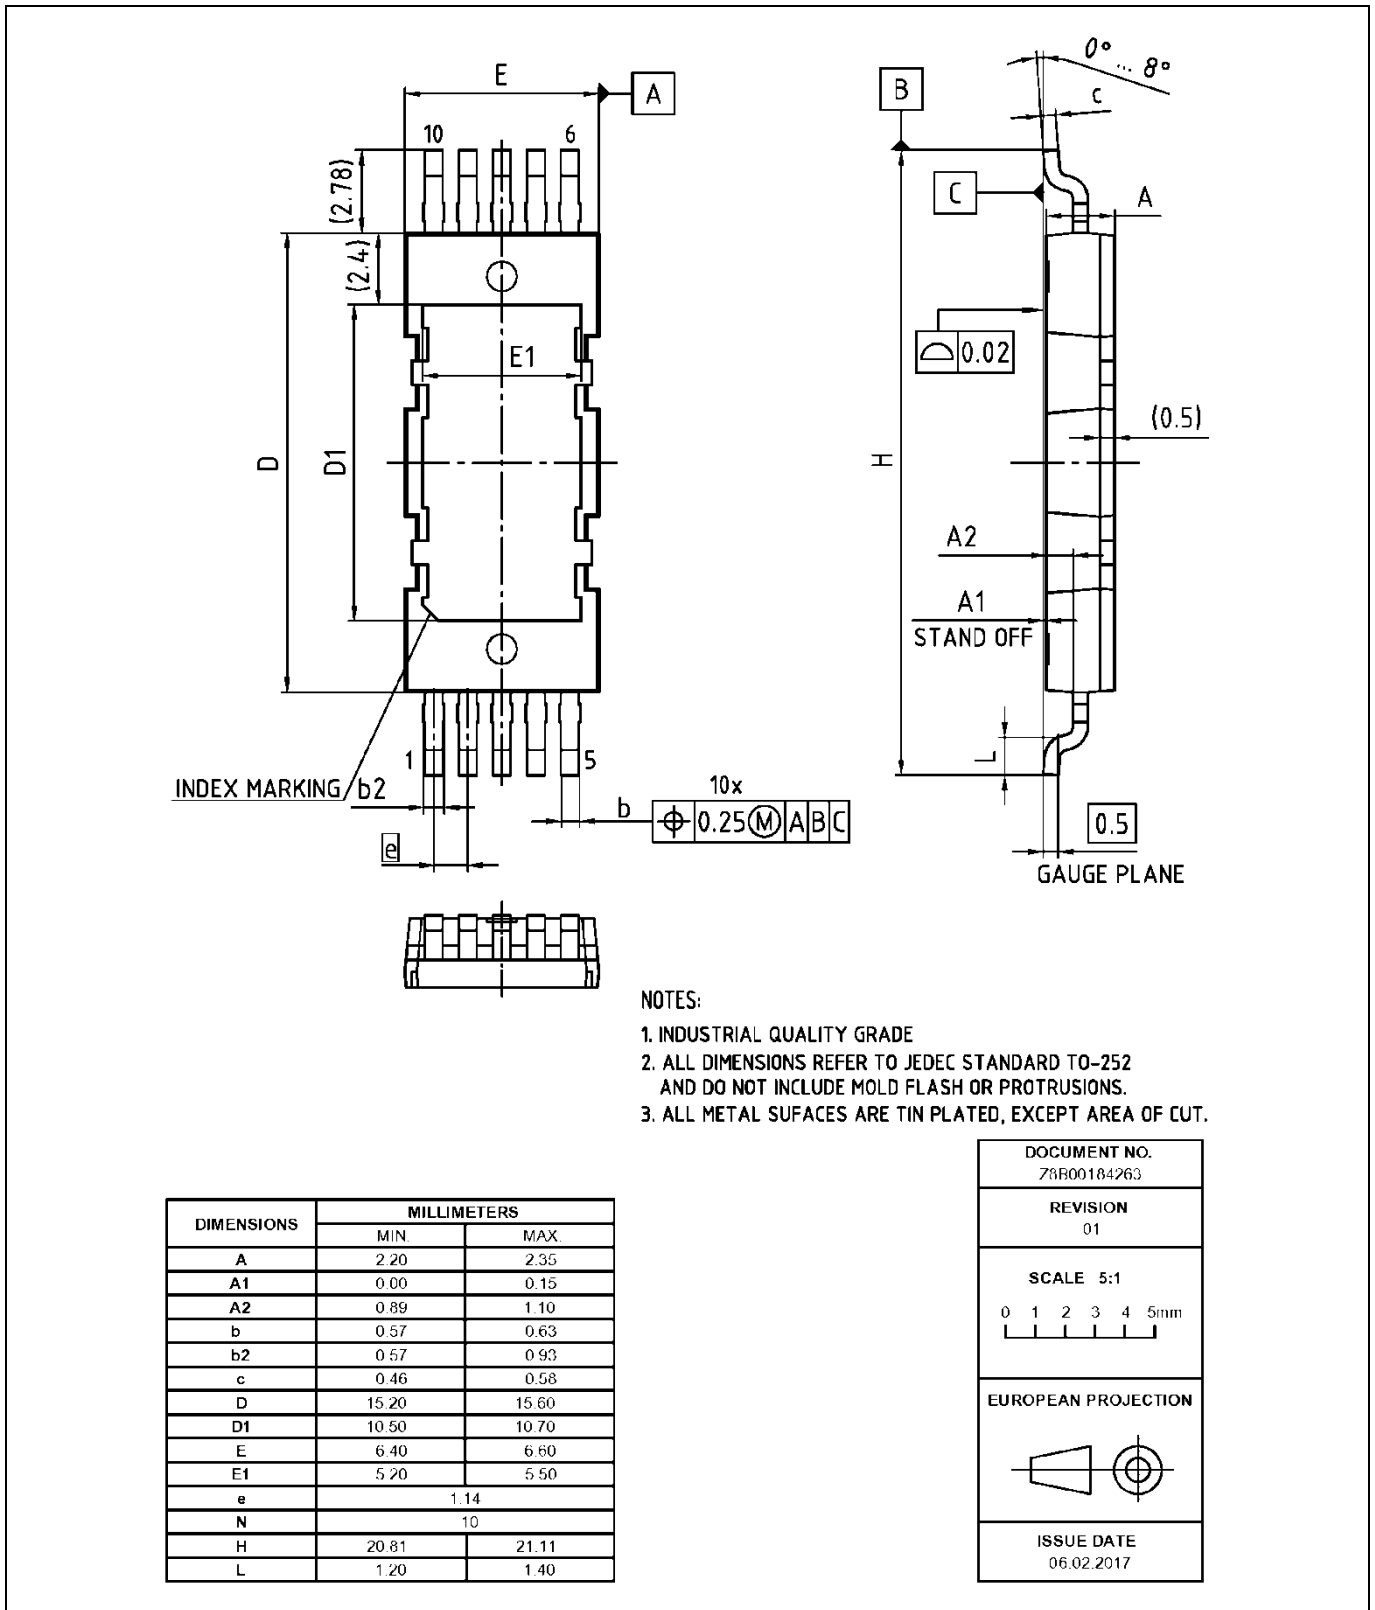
Outlines of the package PG-HDSOP-10-1, dimensions in millimeters
